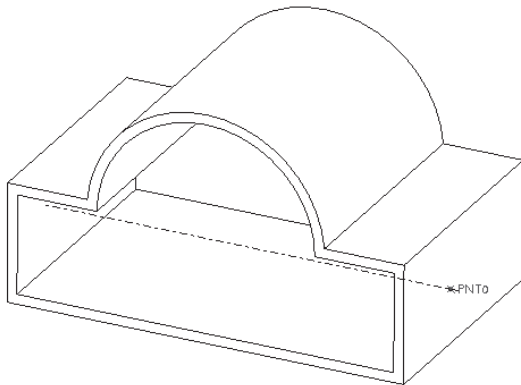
Datum axis passing through the datum point and normal to the plane
